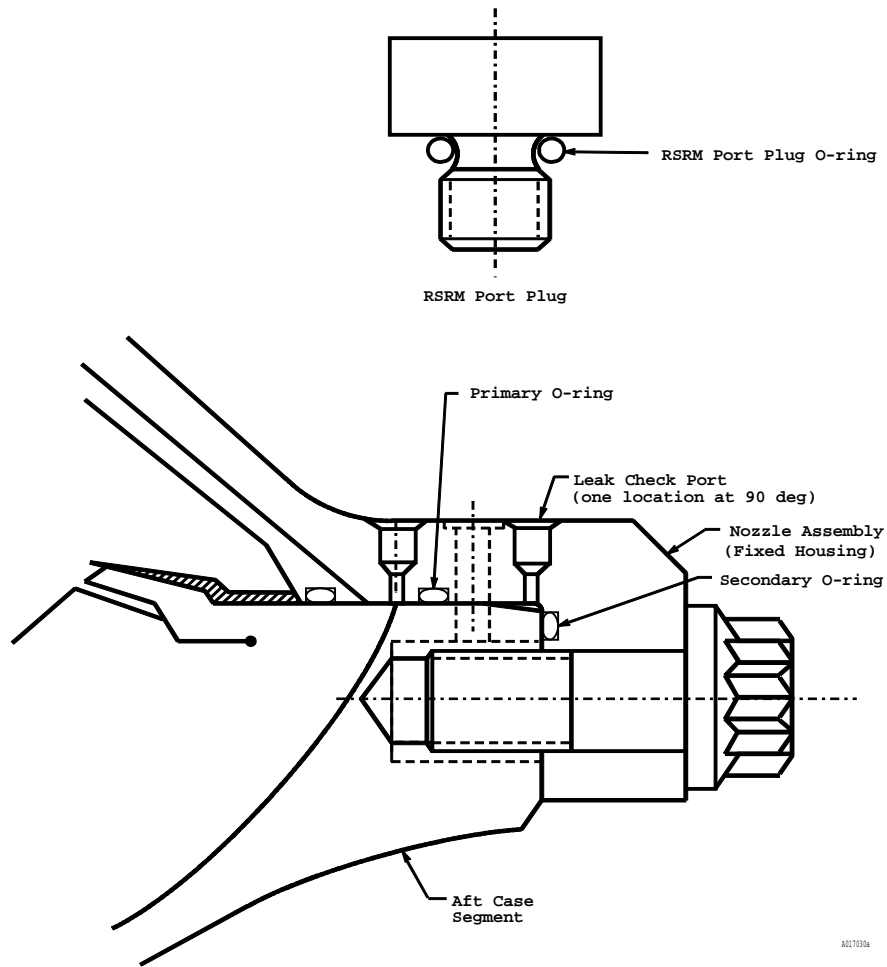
Case-to-Nozzle Joint, Leak Check Port, and RSRM Port Plug
